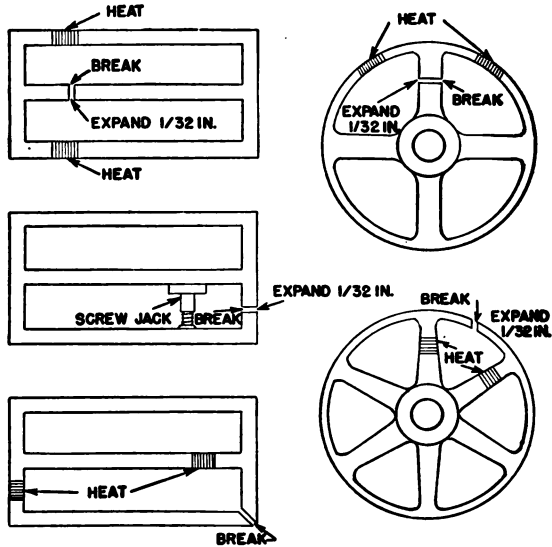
Methods of expanding castings prior to welding.
